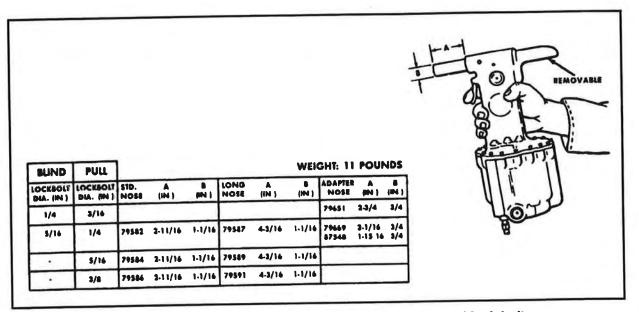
CP353 rivet gun for pull- and blind-type steel lock bolts
